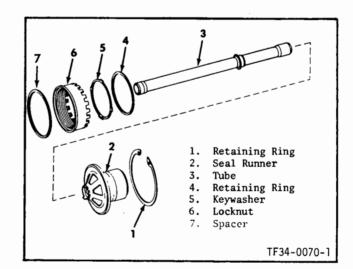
Installation of Low-Pressure Turbine Rotor Locknut
